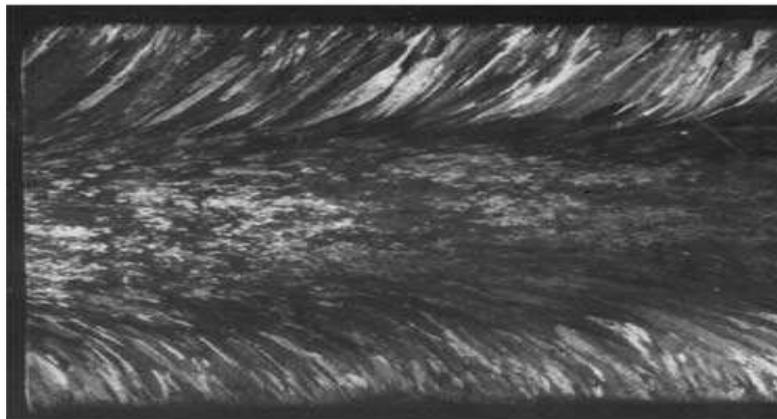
shows the macrostructure of a slab cast in a continuous casting machine [13]
